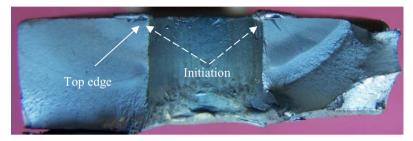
Fatigue crack due to superficial dross on top edge of an oxy-fuel cut hole.
